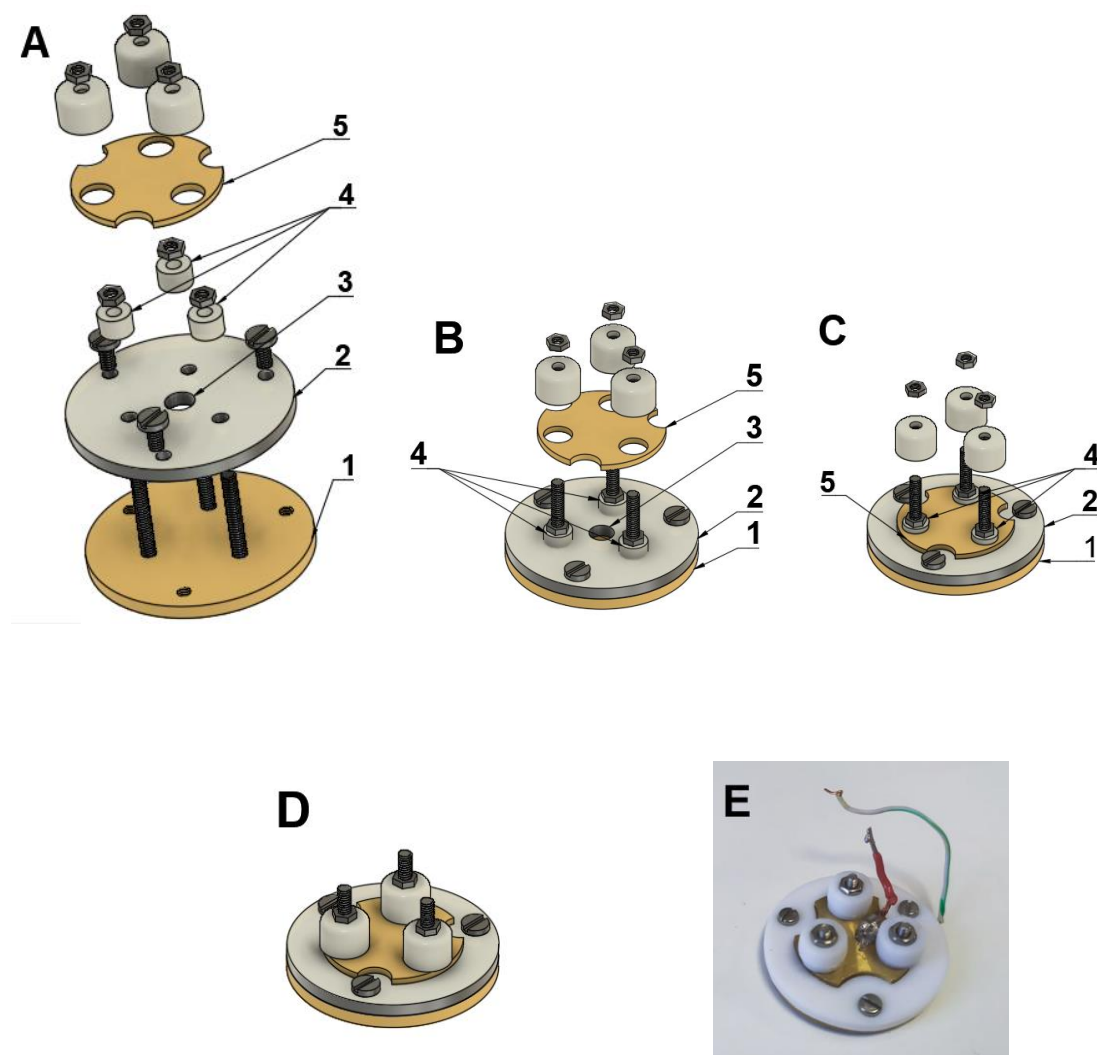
(A-D) CAD representations of conductivity cell showing its main components. (A) Full exploded, (B,C) Halfway assembled views (D) Full assembled view, (E) Photograph of assembled cell. The features highlighted are: (1) Bottom electrode, (2) PTFE Spacer, (3) Sample Area, (4) PTFE Isolation Rings, (5) Top Electrode.
